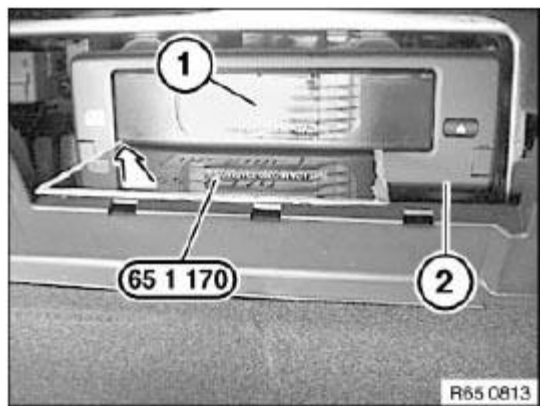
Inserting Special Tool 65 1 170 In CD Changer Magazine
